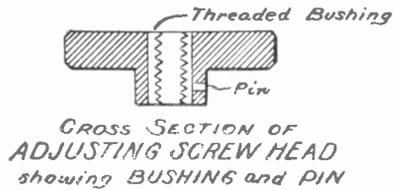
DETAILS OF SCREW HEAD AND BUSHING
